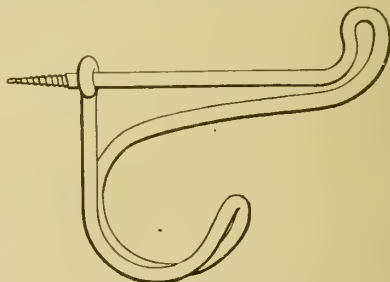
Common Type of Wardrobe Hook Made from Wire.
